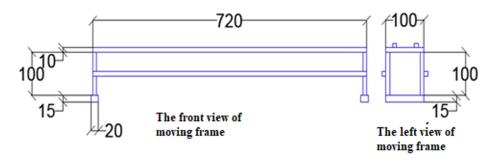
The front view and left view of 2D design of moving frame with dimensions.
